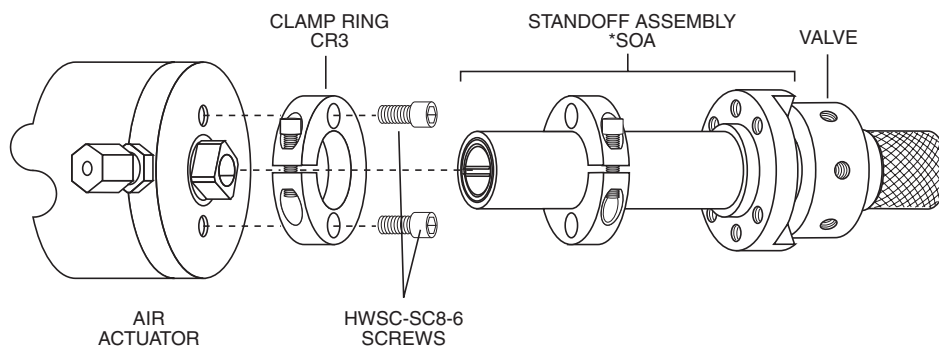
Valco valve (two mounting holes) on an actuator with a standoff assembly
